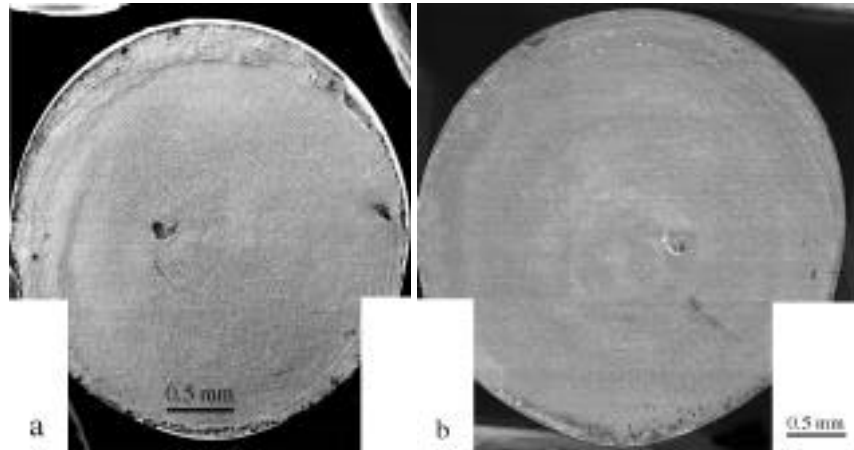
Macro-views of the two fracture surfaces from an ODS-Fe₃Al-to-Haynes 230 joint (a) ODS-Fe₃Al-side (b) Haynes 230-side
